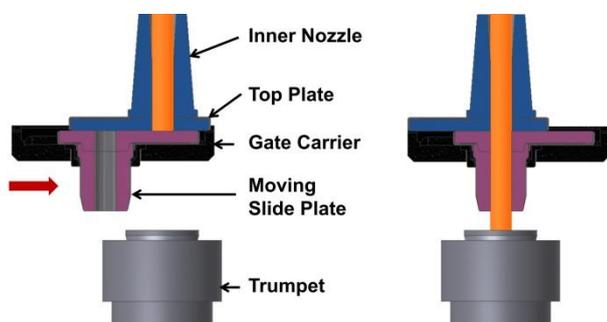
Schematic drawing of a sliding gate valve with two refractory plates
